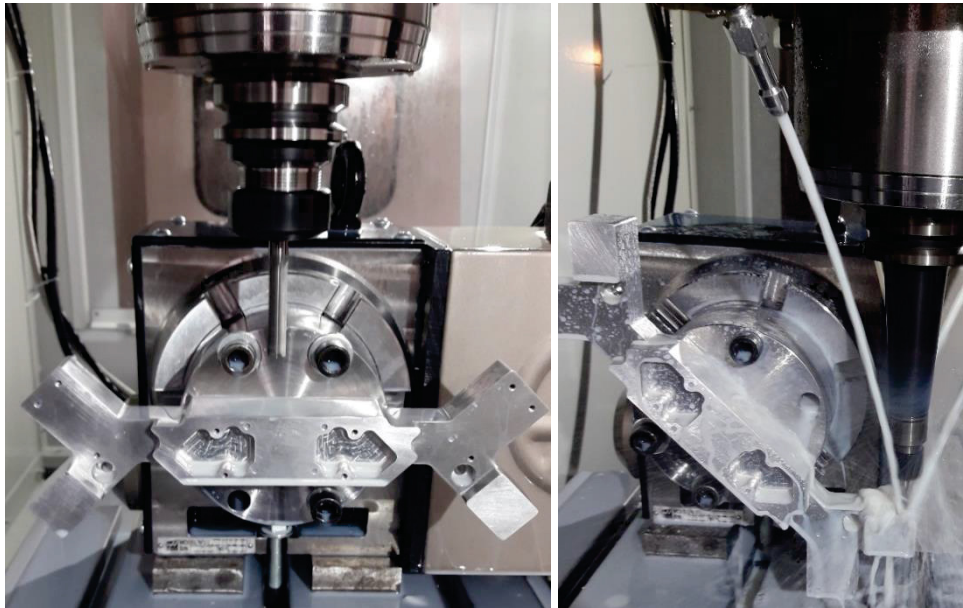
Using rotary table for drilling the holes of roller bearings
